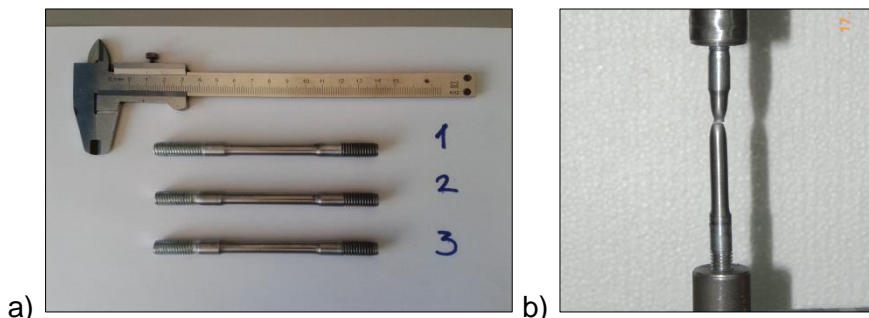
Tensile testing of steel: a) specimens, b) specimen failure after testing
